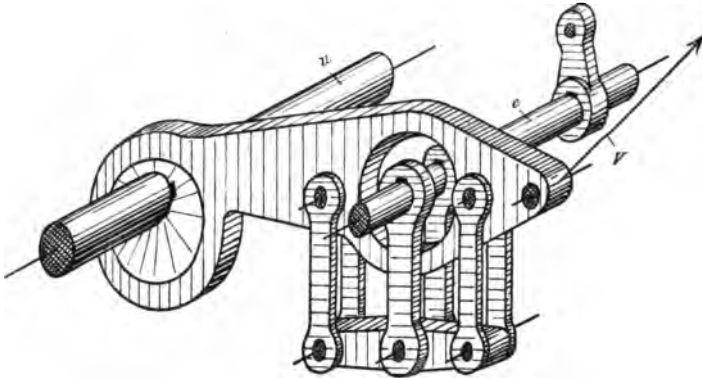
(Note.—*u* = valve shaft; *e* = reversing shaft; *V* = to the valve.)
